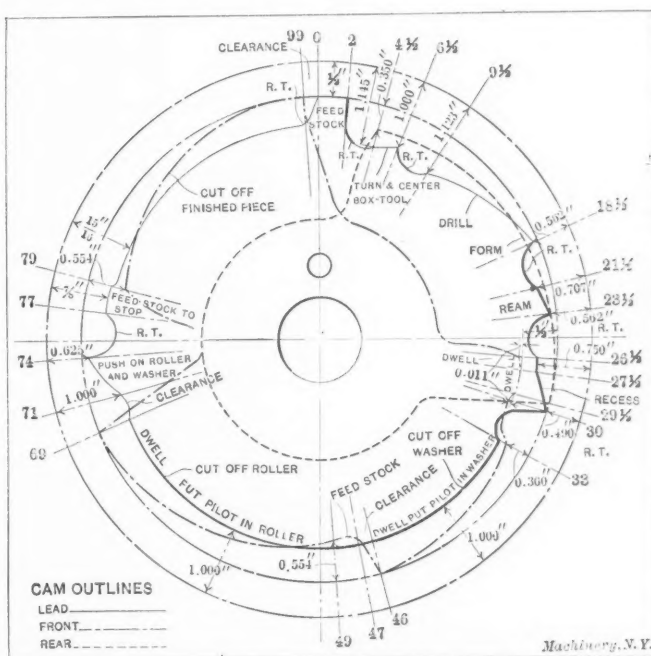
Lay-out of the Cams for Making and Assembling the Various Pieces
